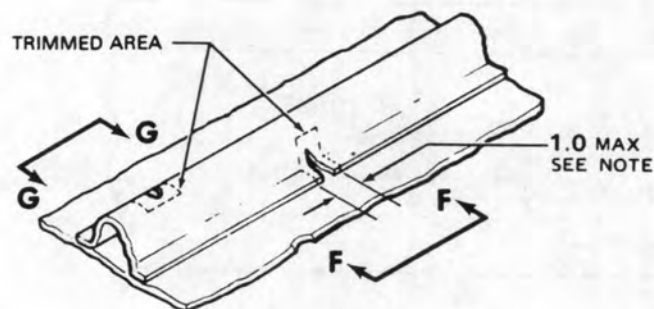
DETAIL E LONGITUDINAL OR LATERAL CRACKS IN WEB AREA
